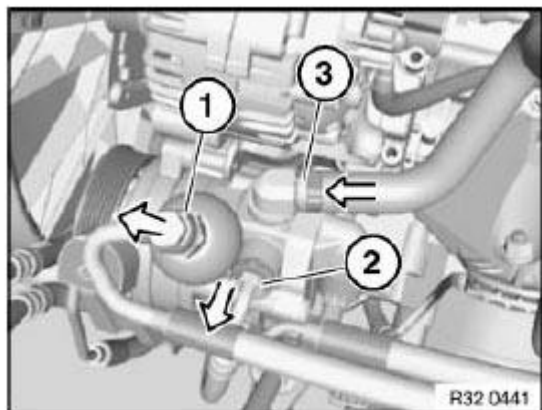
Disconnecting Power Steering Gear Pressure Line
